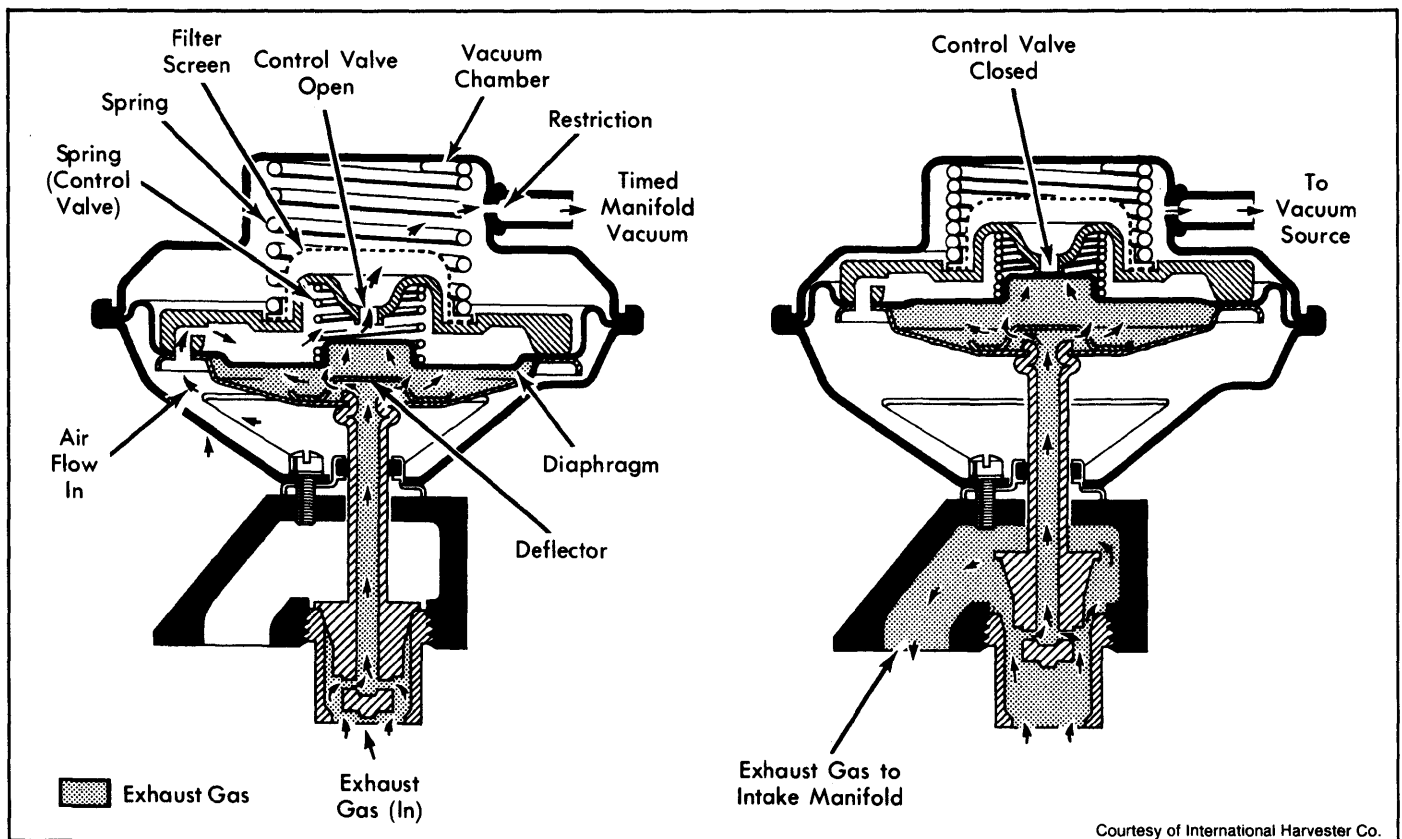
Cutaway View of Positive Backpressure EGR Valve
